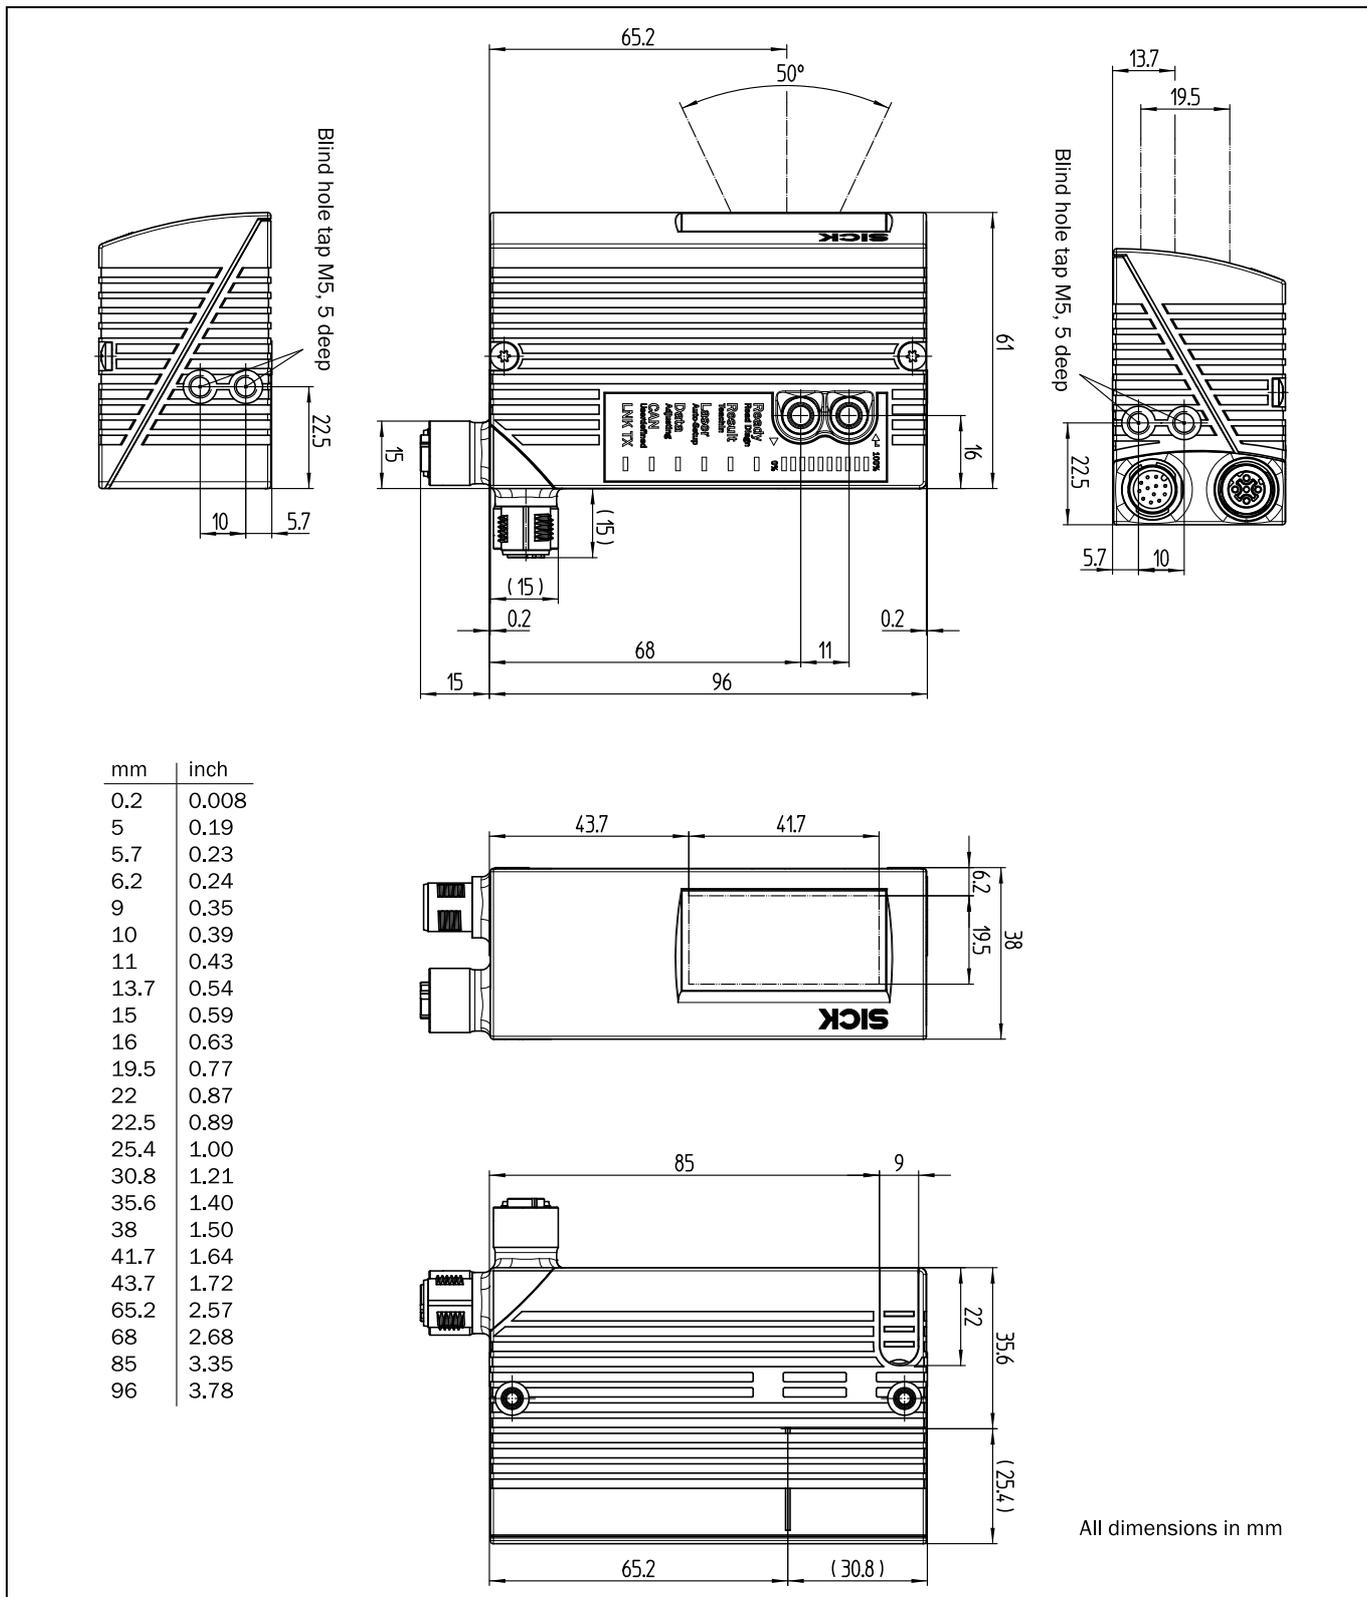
Ethernet version: Dimensions of bar code scanners with front reading window (CLV65x-0120)
